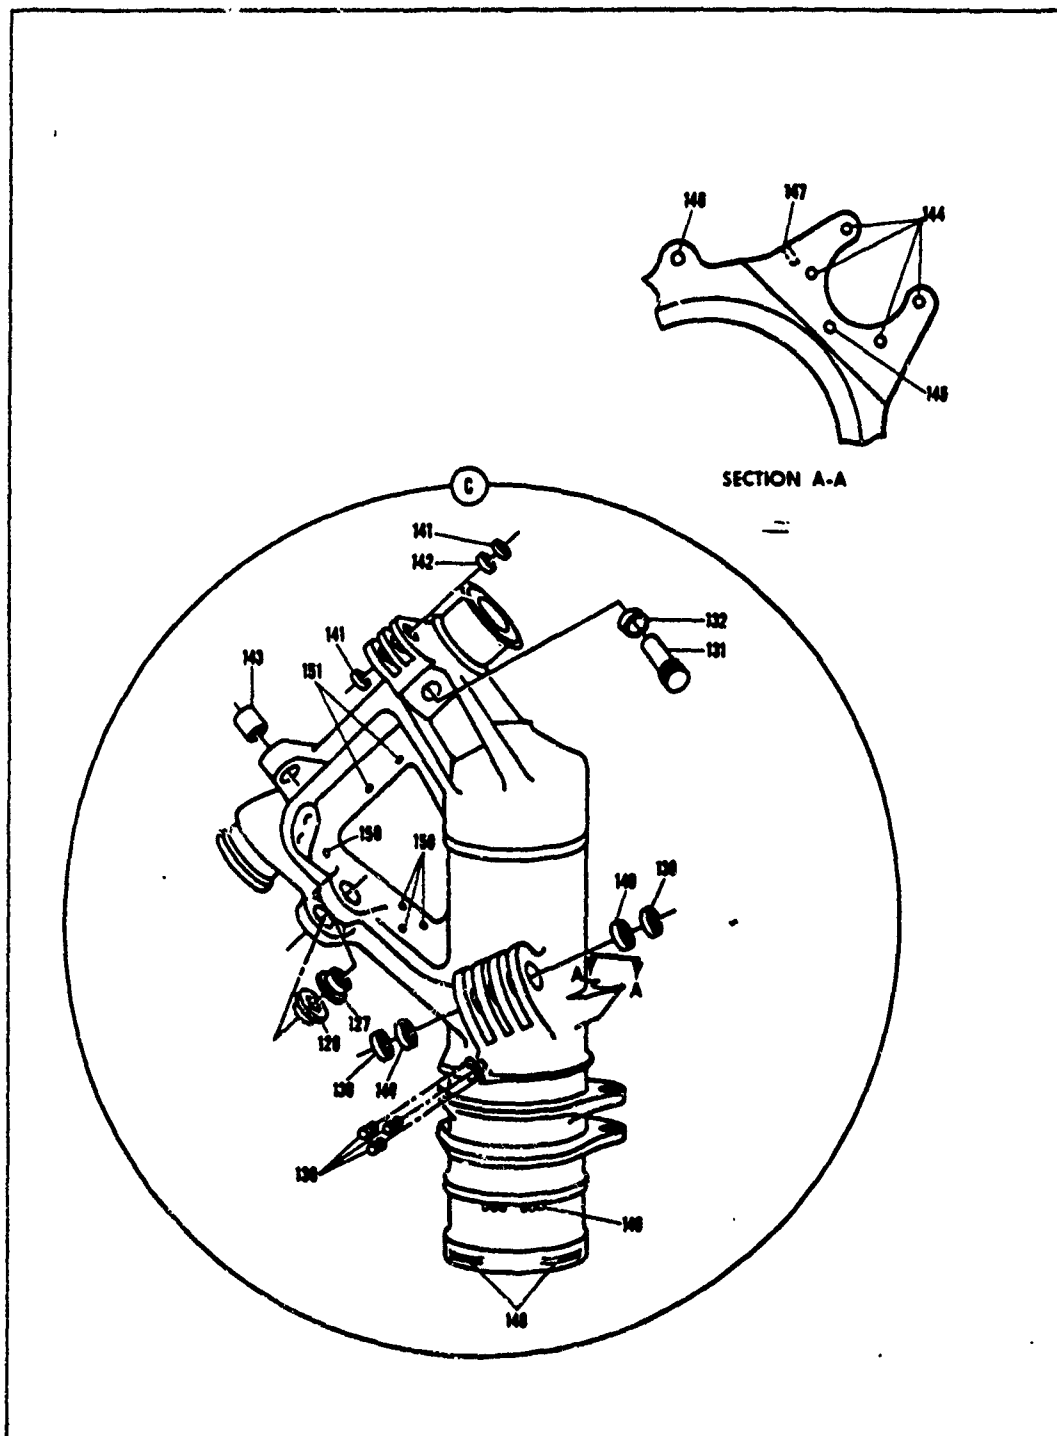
Main Landing Gear Strut Assembly (Sheet 4 of 4)
